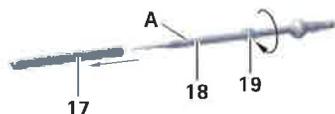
Disassembling the S<sup>4</sup>C screw tap
